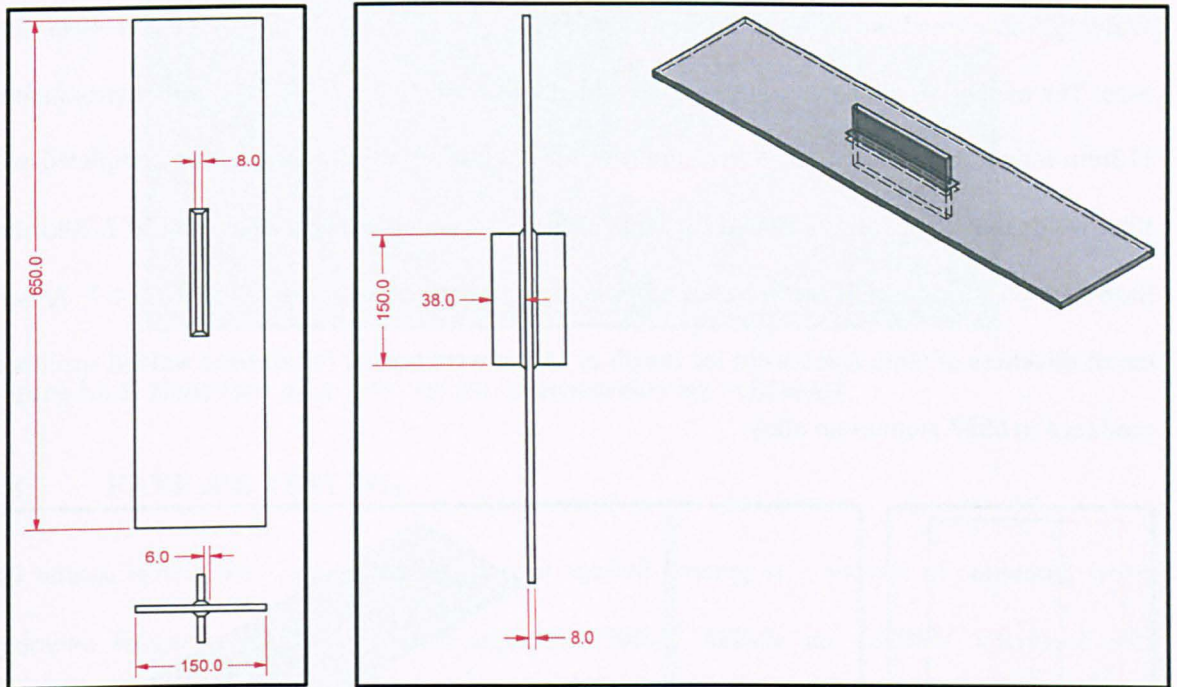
Detailed drawing of a fillet welded specimen with longitudinal attachments manufactured from 8mm thick S355J2+N structural steel.
